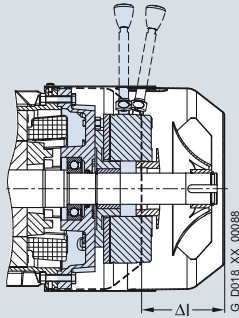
Brake for 1LA8 and 1PQ8 motor series at drive end (DE)
